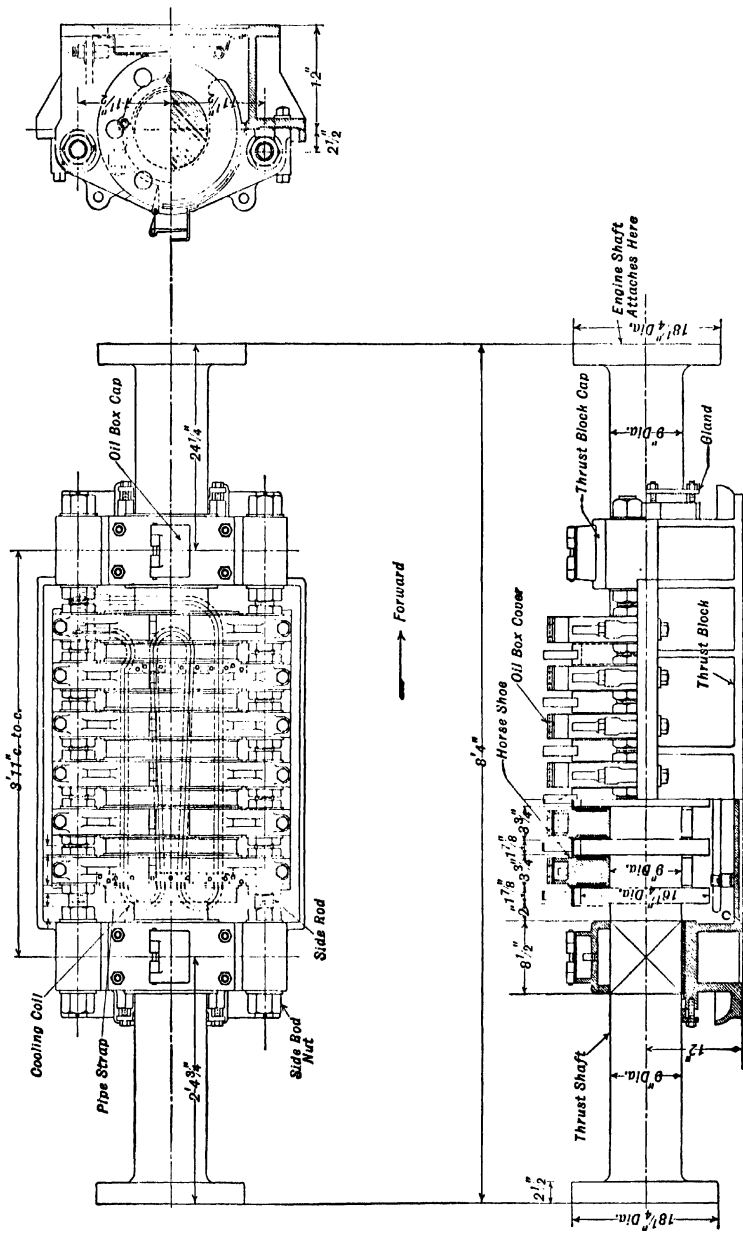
Horseshoe Type of Thrust Bearing for 850 hp. Marine Engine.
